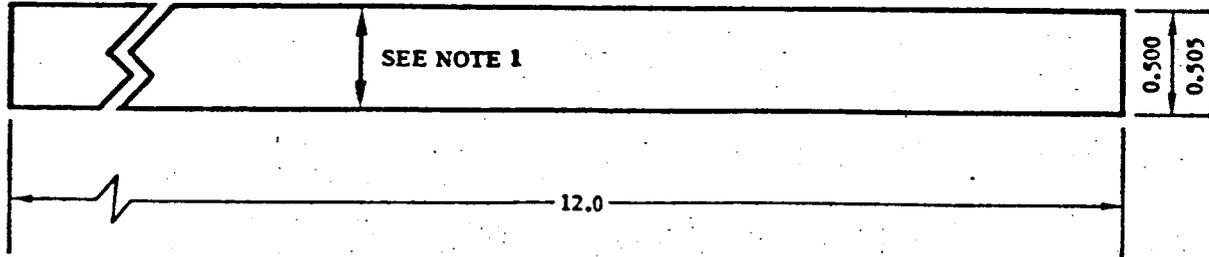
Test coupon for resistance heated tensile test of sheet materials.
